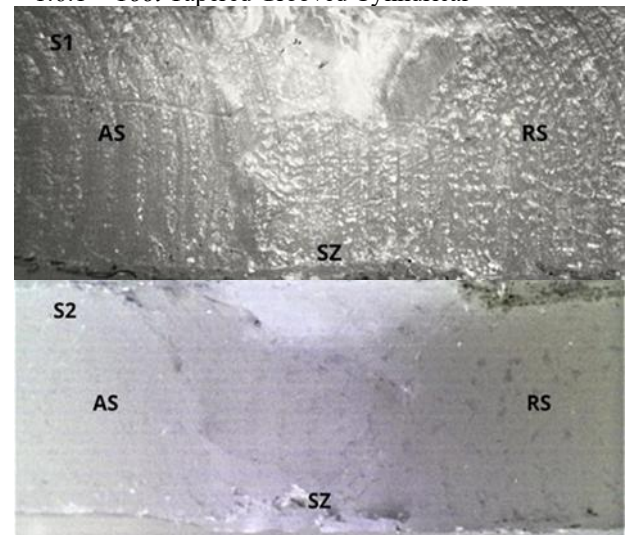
Macrostructure Results FSW Tool Tapered Cylindrical
